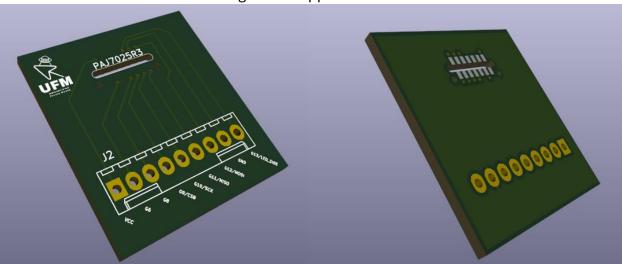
Custom PixArt Sensor PCB Front and Back View Iteration 1
